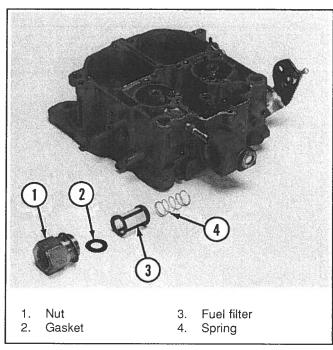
Removing Fuel-Inlet Filter Assembly
